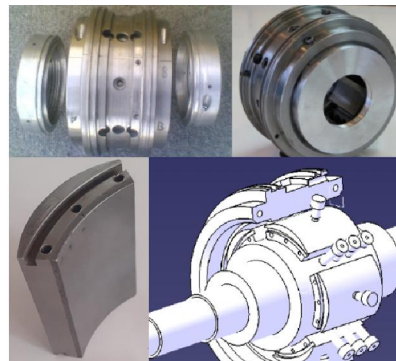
The built bearing, internal layout and one of its shoes (the holes on the pad are intended for the purpose of installing a thermocouple)
